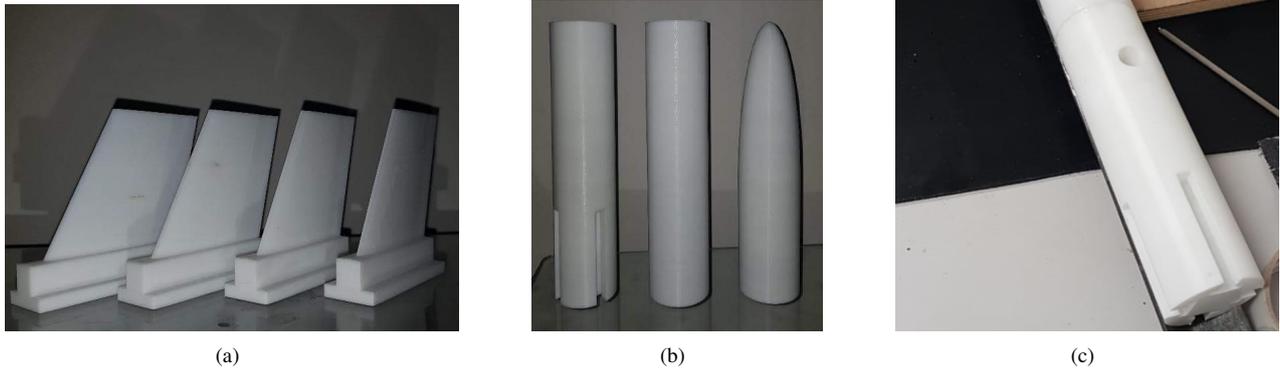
3D printed parts: a) Fins, b) three parts of the fuselage, and c) detail of the hole for coupling with the wind tunnel rod.
